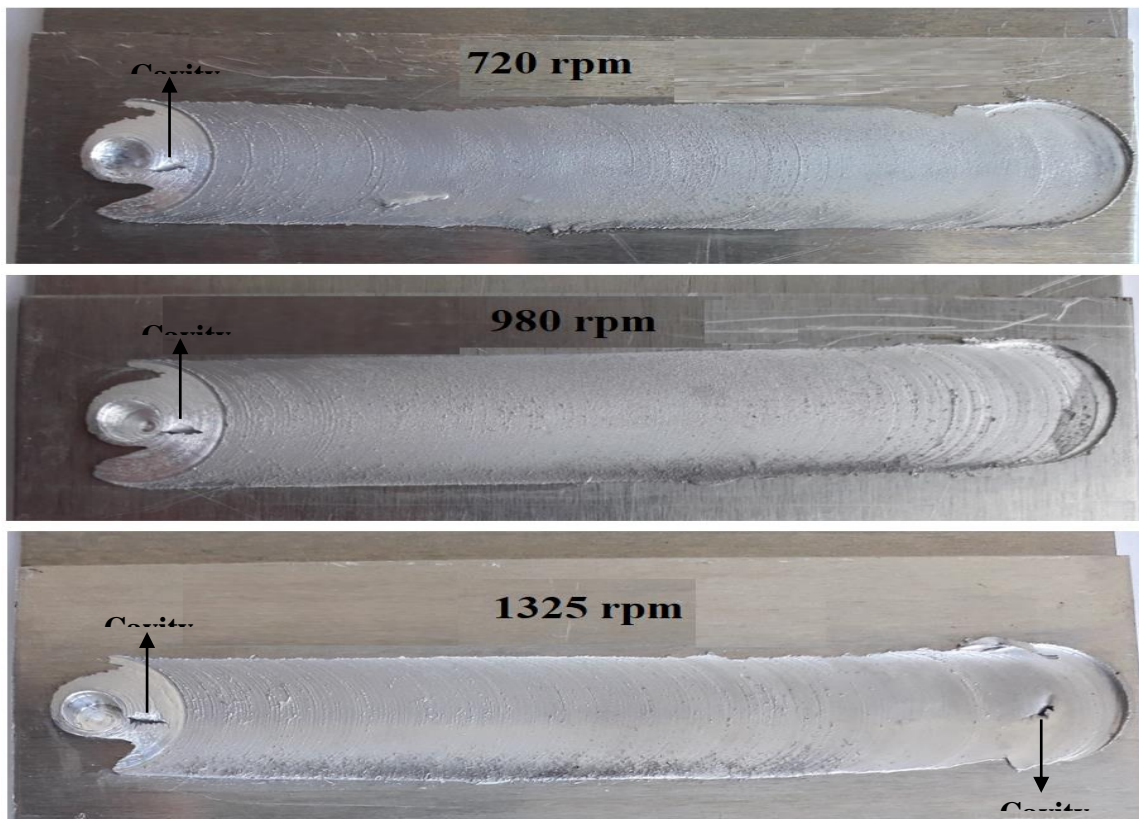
Top view of the FSLW welds produced at different tool rotation speeds
